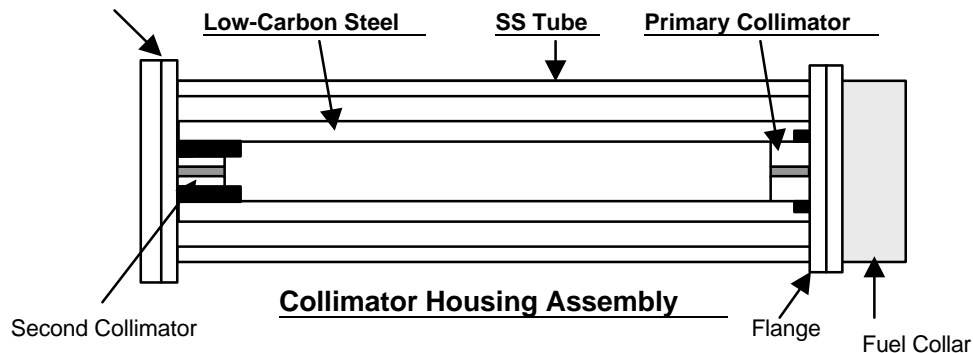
Schematic Arrangement of 1st and 2nd Collimator in the Housing Assembly.
